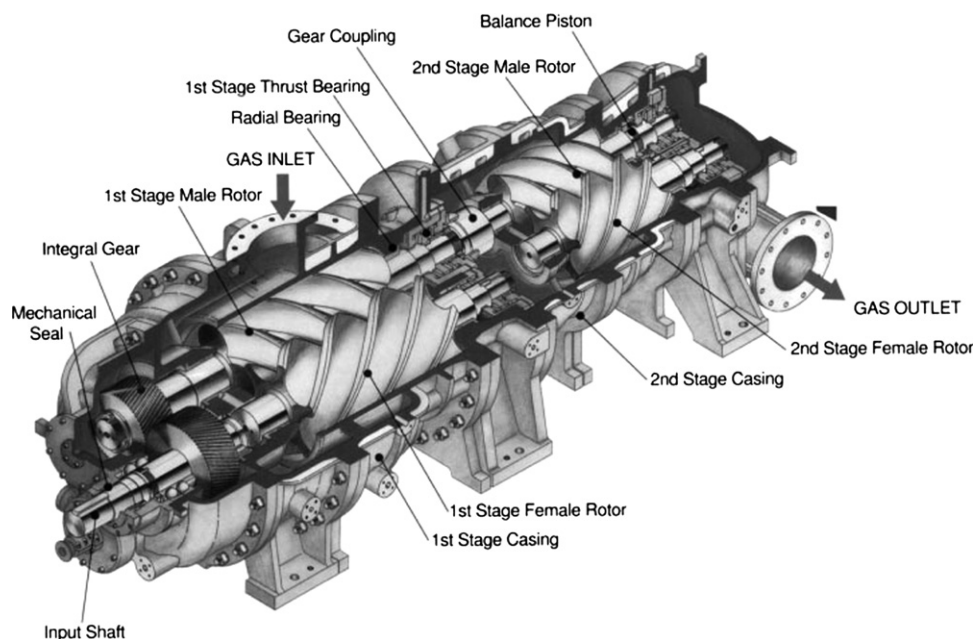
• Two-stage, tandem screw oil-flooded compressor. Note: integral gear used for speed increase of male rotors (Courtesy of Kobelco – Kobe Steel Ltd)
